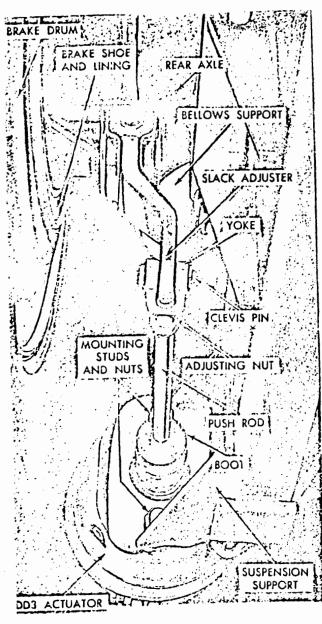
Rear Brake Actuator and Slack Adjuster Installed (Typical)
